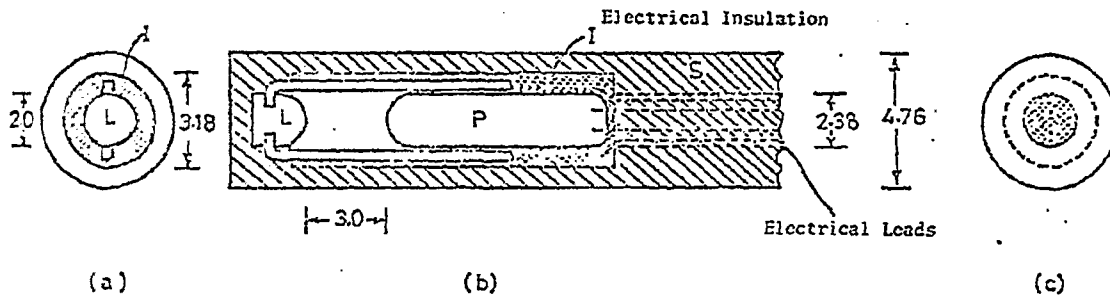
Bubble probe Design: a) left end view, b) cross sectional view, and c) right end view of the optical probe (Dimensions indicated are in mm).
